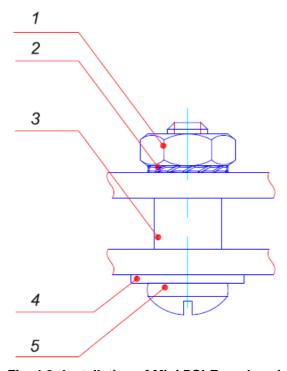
Installation of Mini PCI-E cards using fasteners
